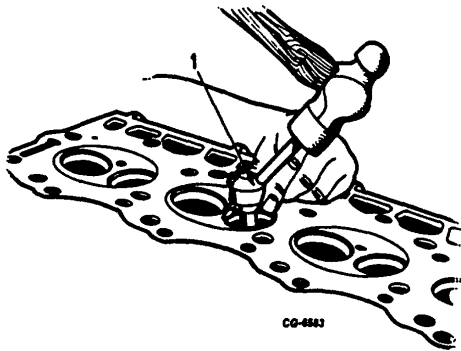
Staking Valve Seat Insert in Cylinder Head with Peening Tool
